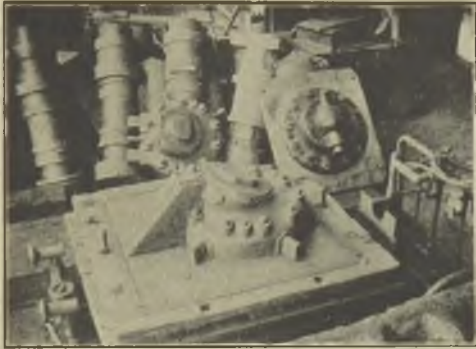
CYLINDER HEAD ON THE MOULDING MACHINE.
